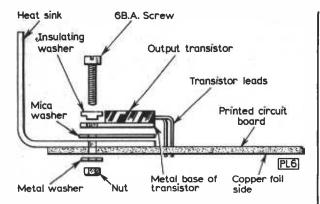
Side elevation showing exploded view of power output transistor mounting (see text).
